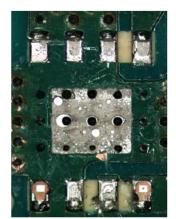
PCB pad after prying the reflowed unit from the board (No evidence of shorts)
